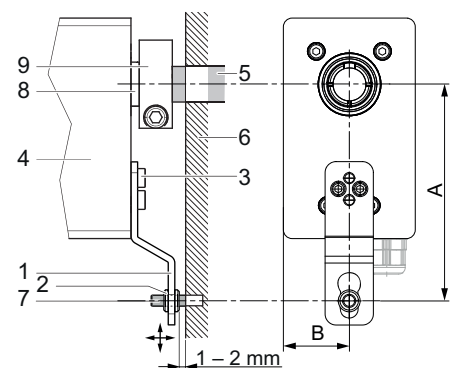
Installation dimensions; machine shaft (5), output shaft (8), clamping ring (9)
